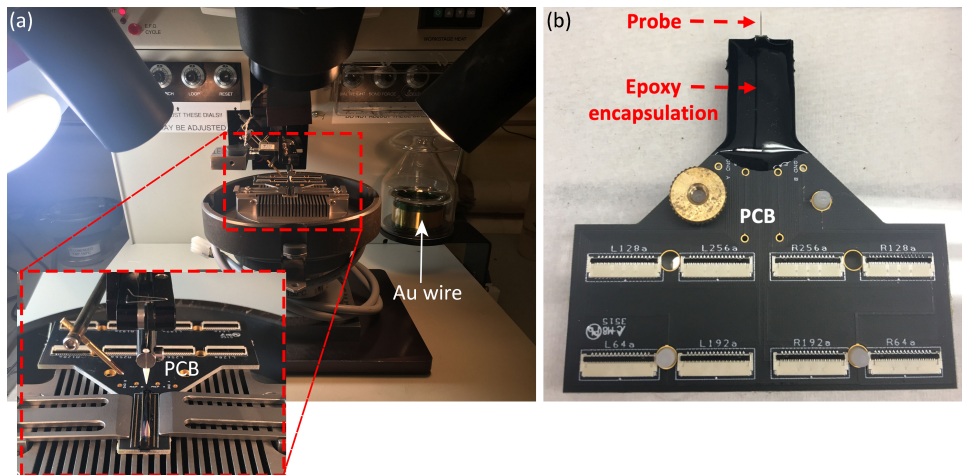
(a) Setup used for Au wirebonding the probes to PCB. (b) Photo of a final and packaged device mounted in a PCB and with black epoxy encapsulation.
